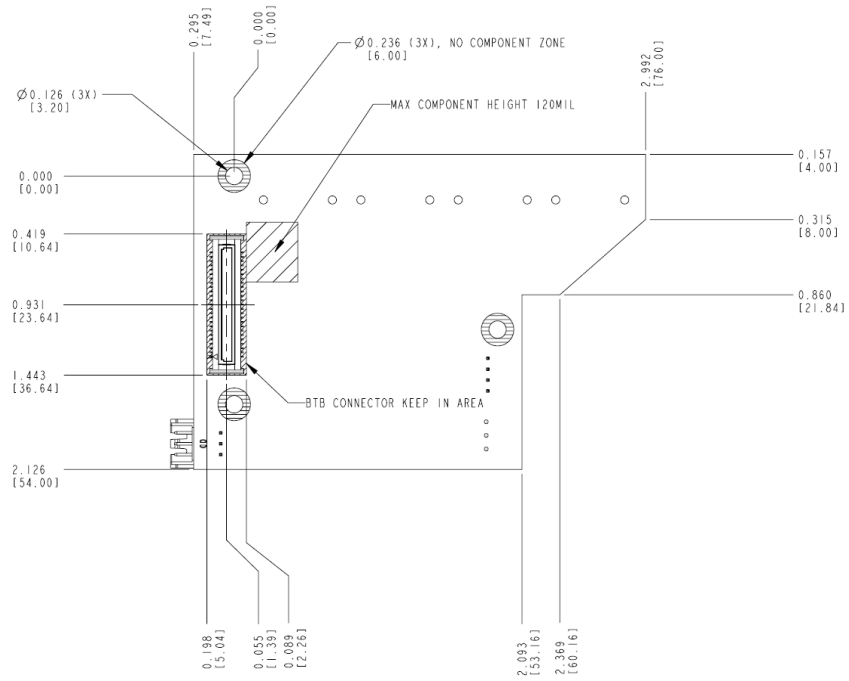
AXX4SASMOD Mechanical Dimensions (Bottom View)
